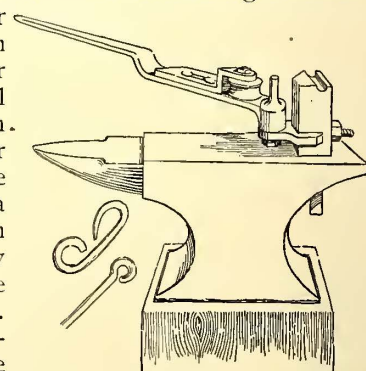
ADJUSTABLE BENDING TOOL FOR HOOKS AND LINKS.
